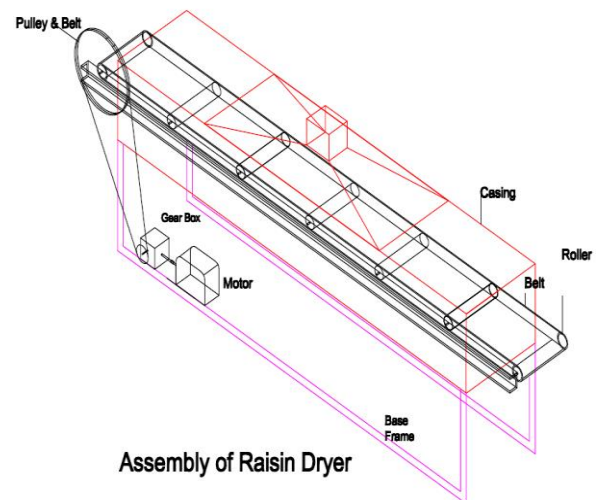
shows assembly of raisin dryer. The motor is rotated in clockwise direction and gearbox output shaft is rotated in anticlockwise direction. When electric supply is start the motor is turn on. The motor is coupled with gear box with the help of coupling; hence output shaft of gear box is rotated. The output shaft of the gear box is connected to the shaft with help of belt pulley arrangement attached to them. Due to belt pulley arrangement required constant speed is achieved so that conveyor rotates as per requirement. The motor and gear box arrangement is based on
